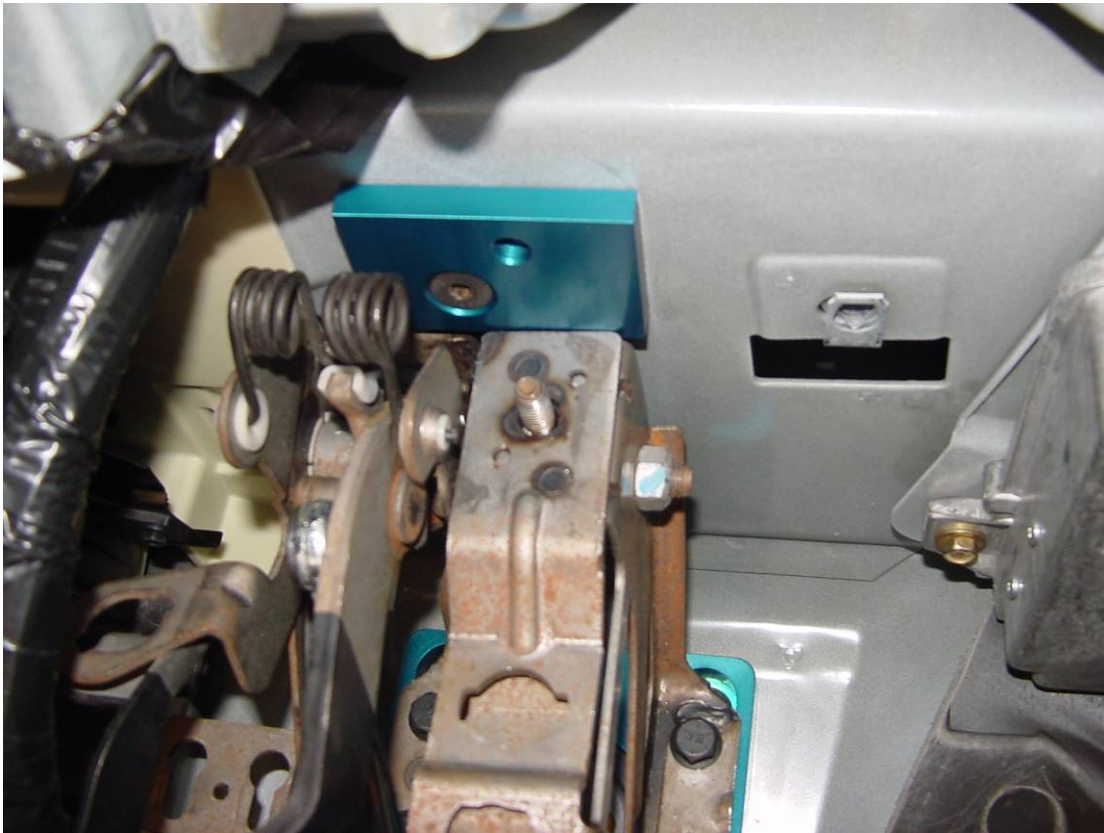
Aligning the overhead bracket to the F-Body pedal assembly
